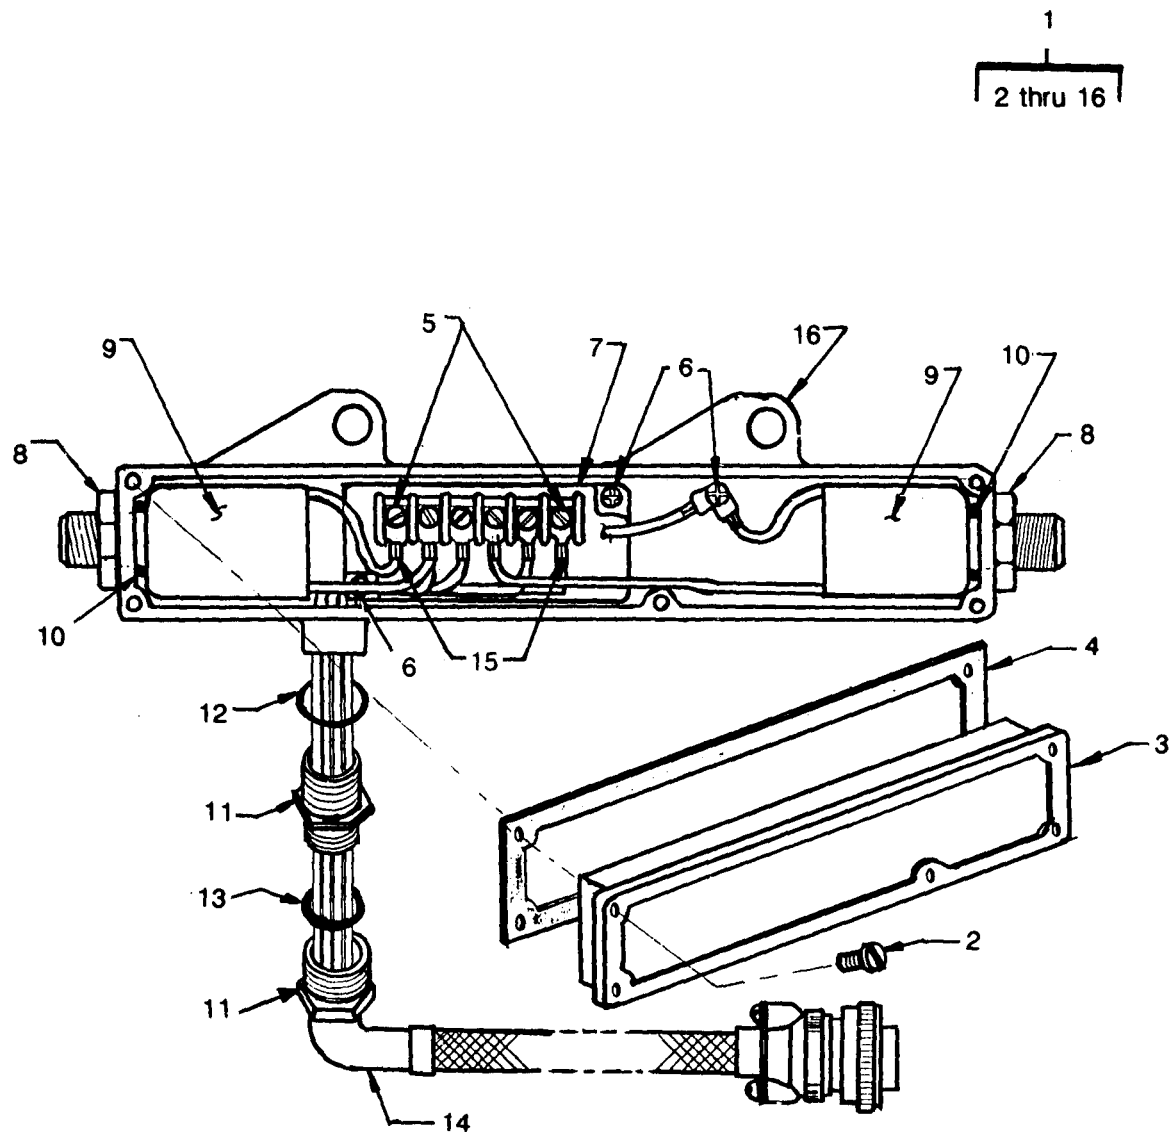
Breakerless Ignition—Left Side (Sheet 1 of 5)
